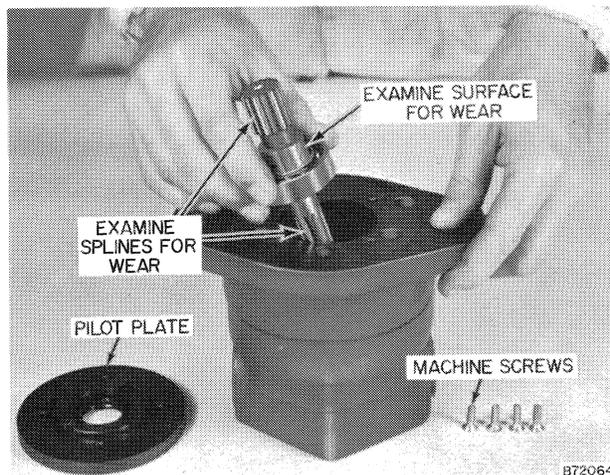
Removing Driveshaft - Ball Bearing Assembly
